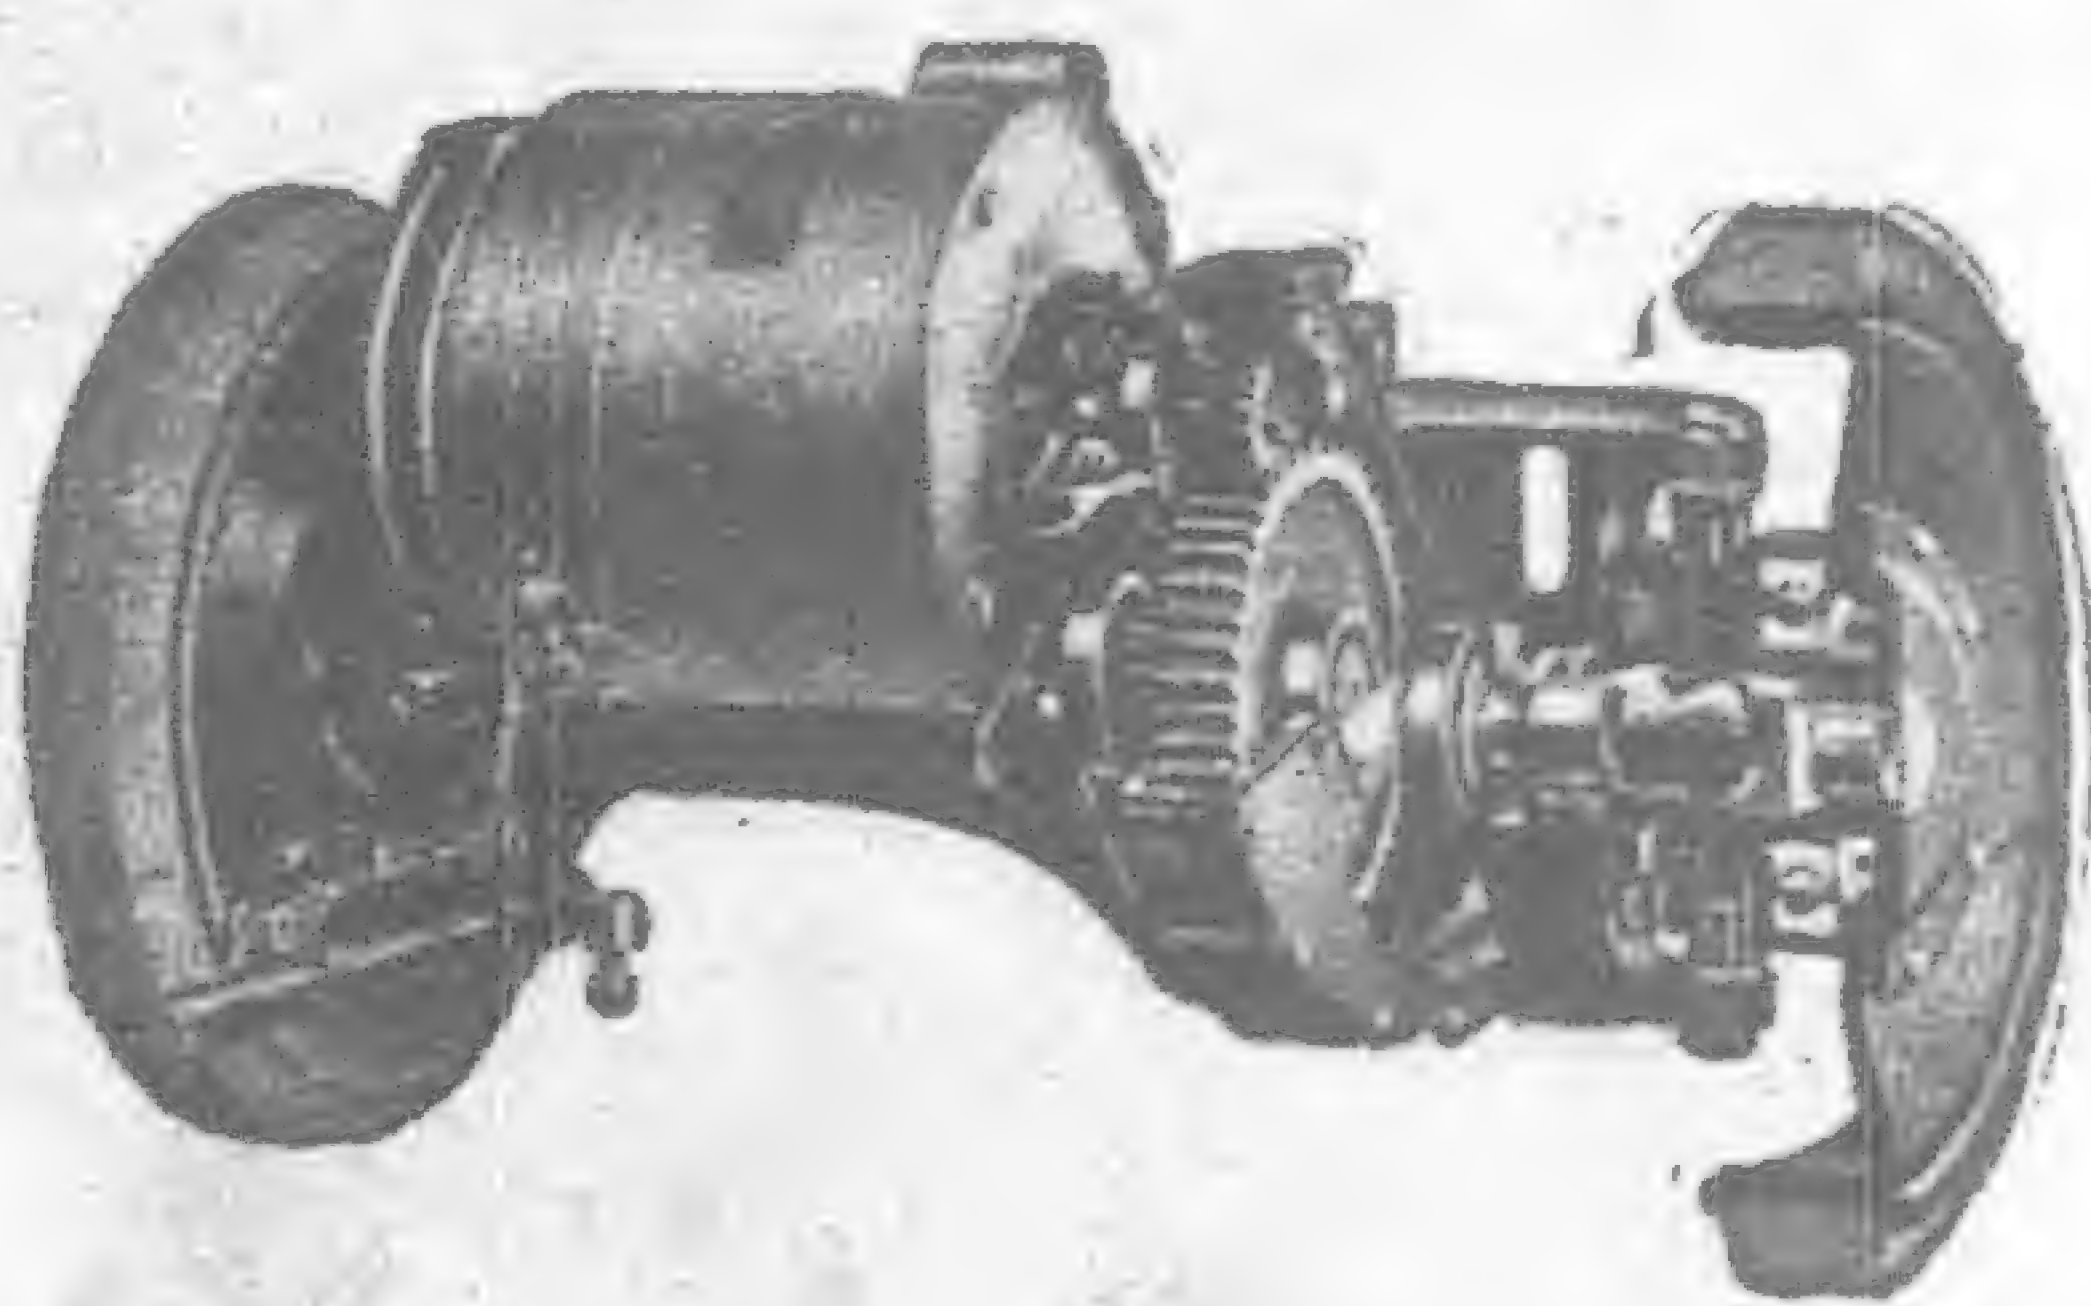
Main Drive Unit used in Industrial Trucks. Nickel Alloy Steel is used in Vital Parts
